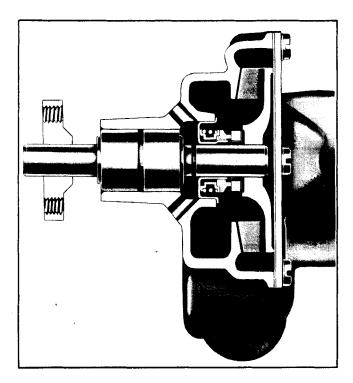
A-9 Cross Section of Water Pump (307 V-8)
